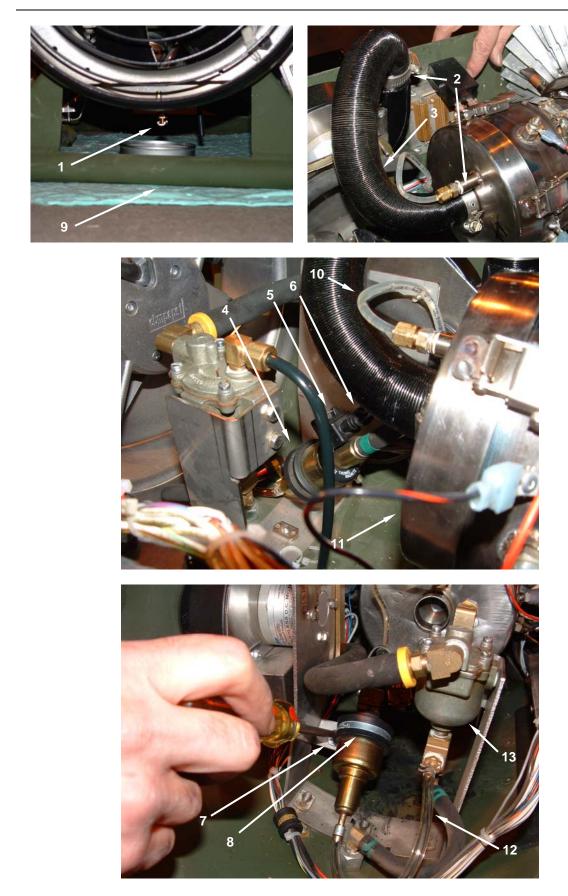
Replace the Fuel Pump and Fuel Pump Hoses - Disassembly.
